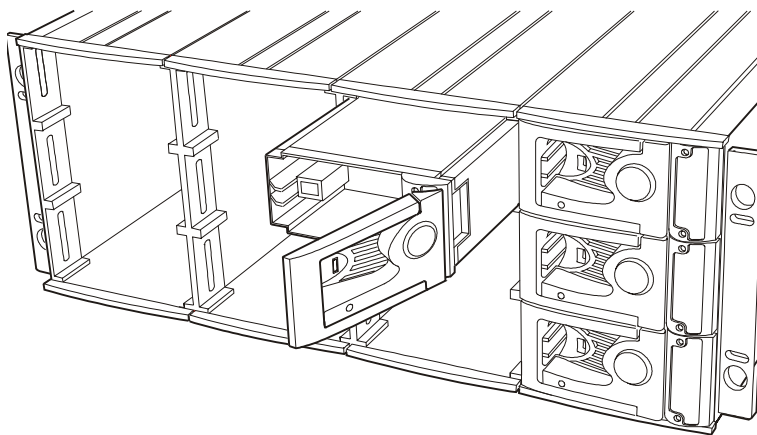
Installing an FC-AL Drive Carrier Module (3)
